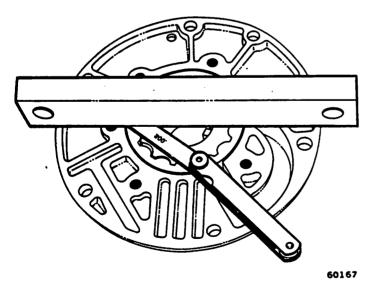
C-51 Measuring Pump Rotor End Clearance-Model 999
